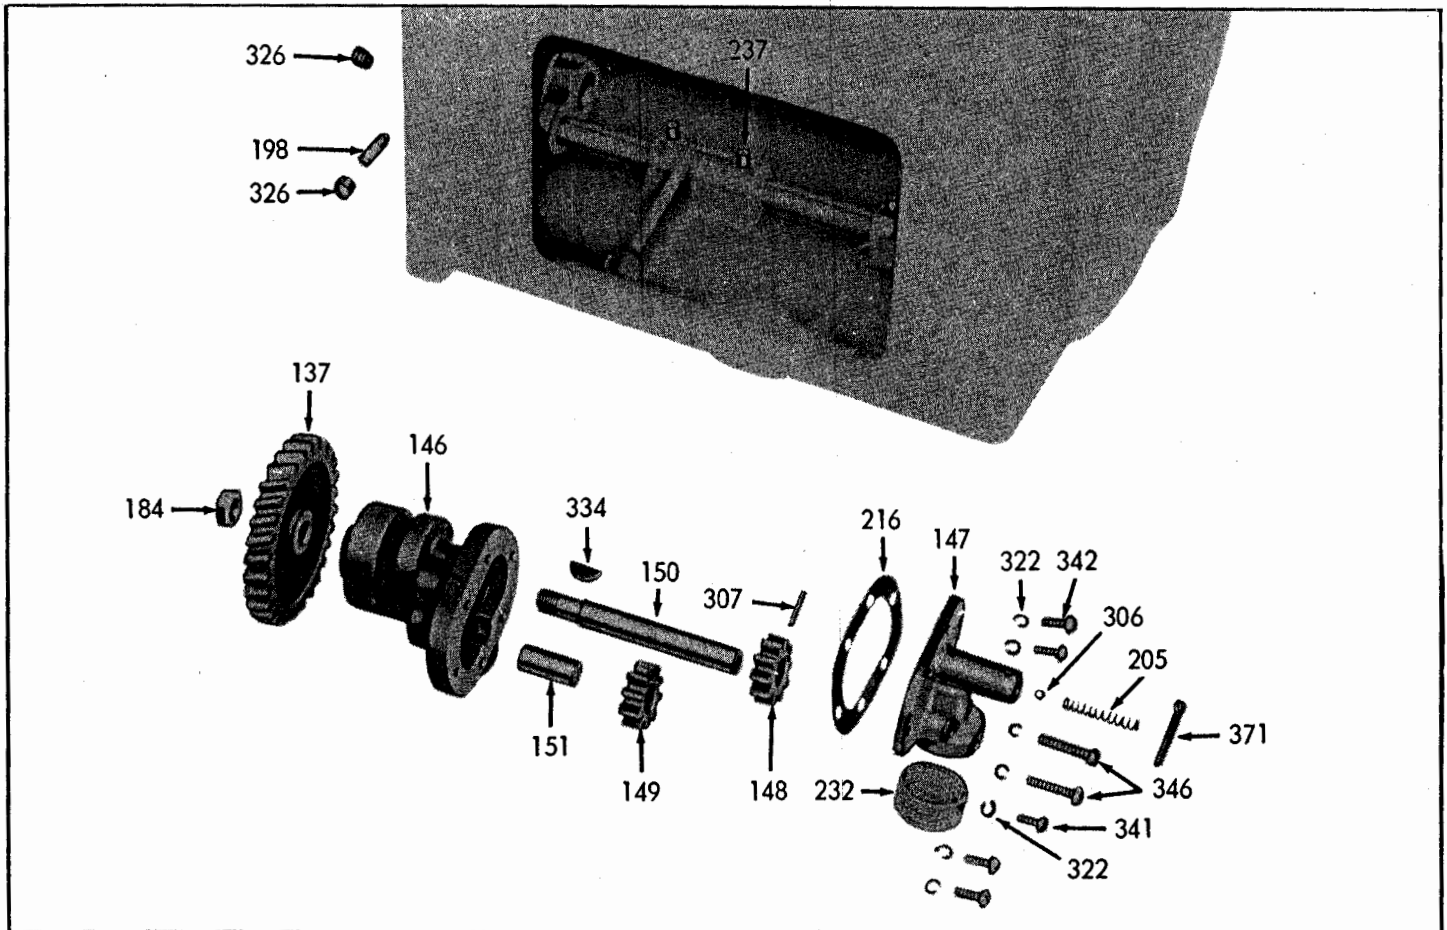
, Ref. No. 144, OIL PUMP ASSEMBLY
